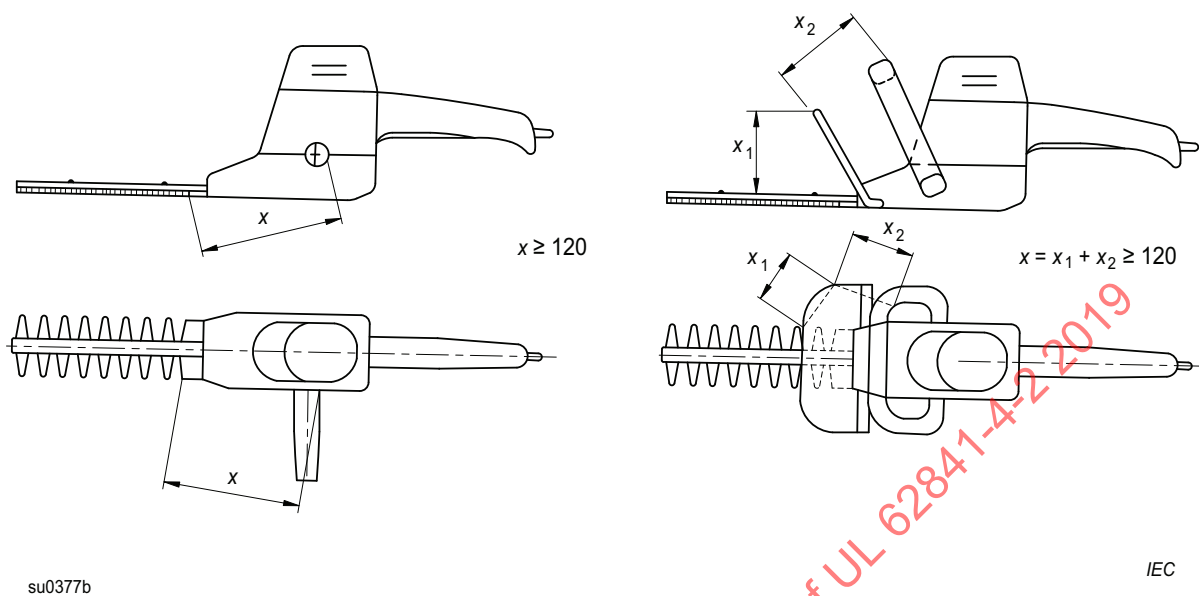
Adjustable front handle limits for side to side handle rotation
